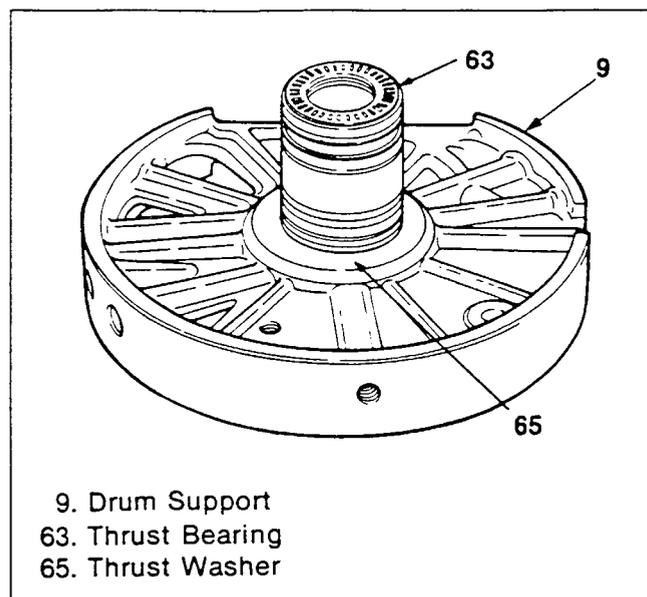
Drum Support Thrust Bearing and Thrust Washer Installation
